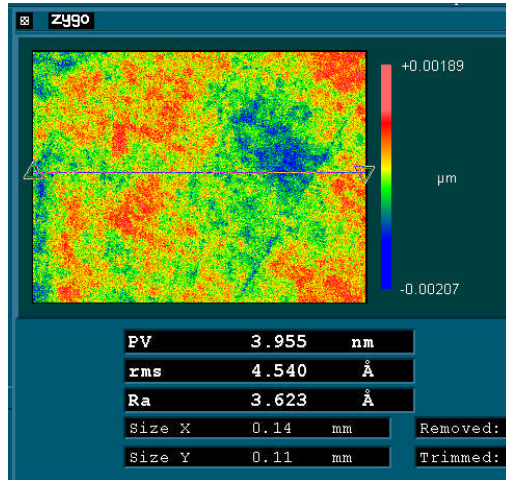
Test Plate – CVD over Brazed SC30 50mmx50mmx8mm Sections using a 50X objective
